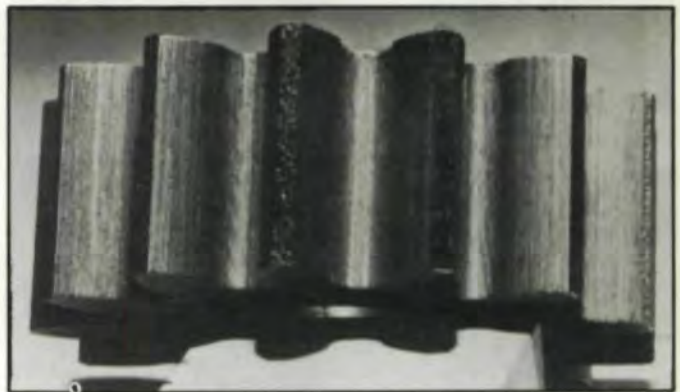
Shaper-cut finish of left-hand gear in Fig. 8 as produced with the cutter making 121 strokes per minute and feeding at a rate of 0.001-in. per stroke.
